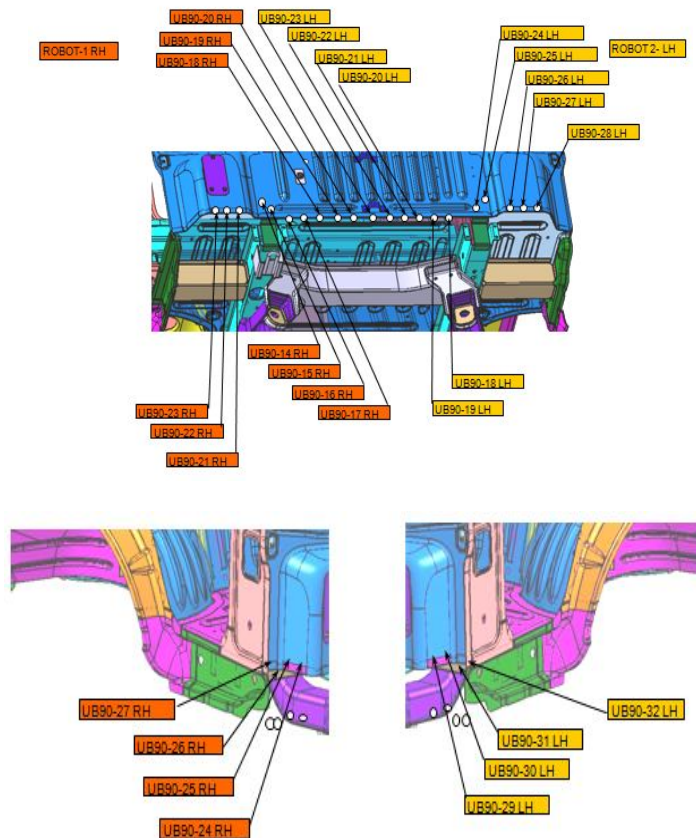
(a) Location of weld Spots on Front Panel.
